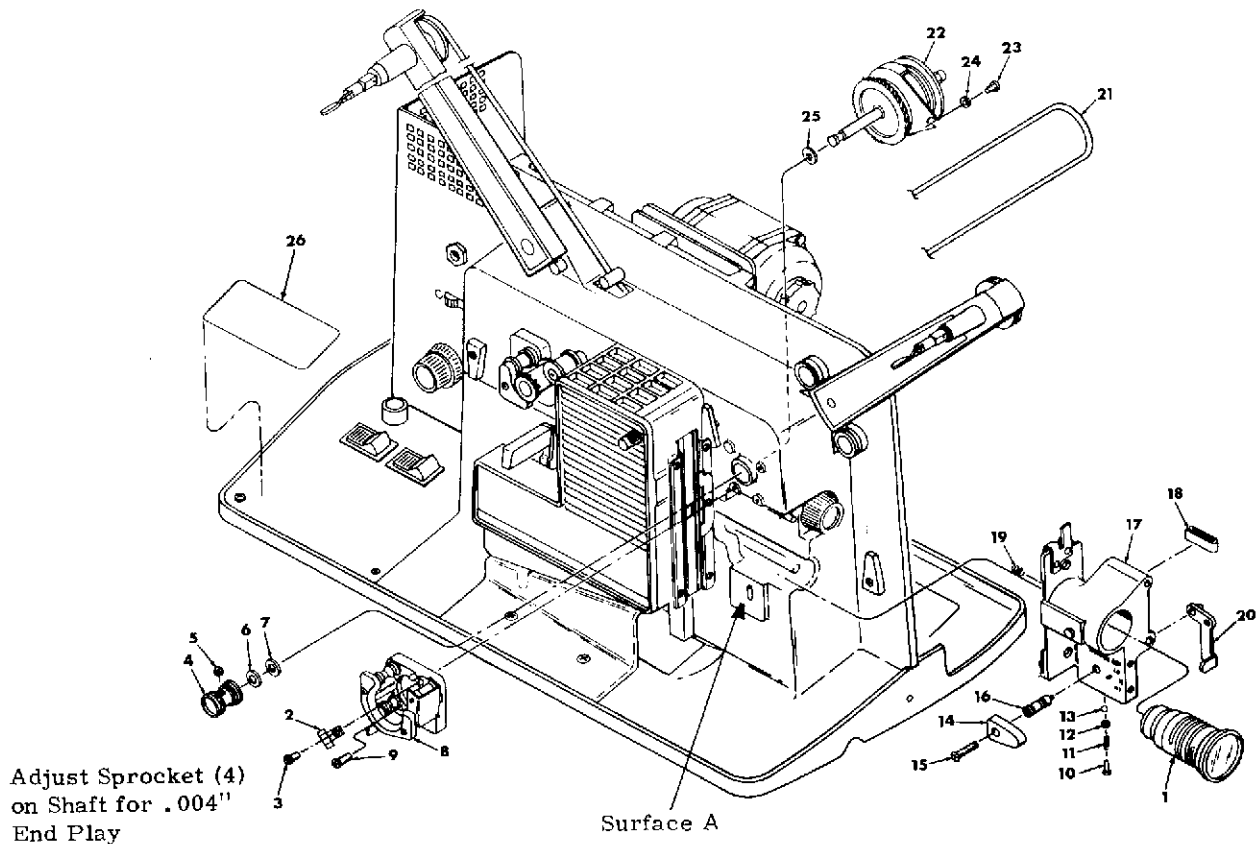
DISASSEMBLY AND REASSEMBLY FEED AND REWIND CLUTCH
